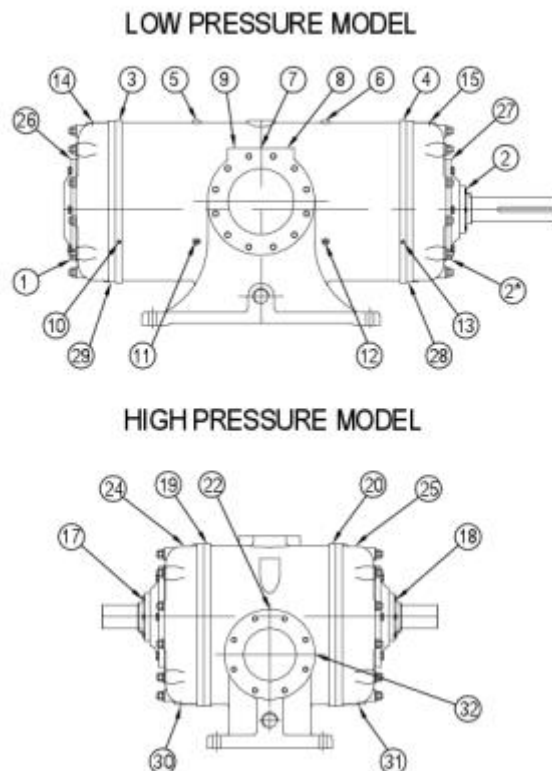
Compressor lubrication injection points, inlet side shown. For more specific locations see the compressor general arrangement drawings available on the Ro-Flo Compressors website.
